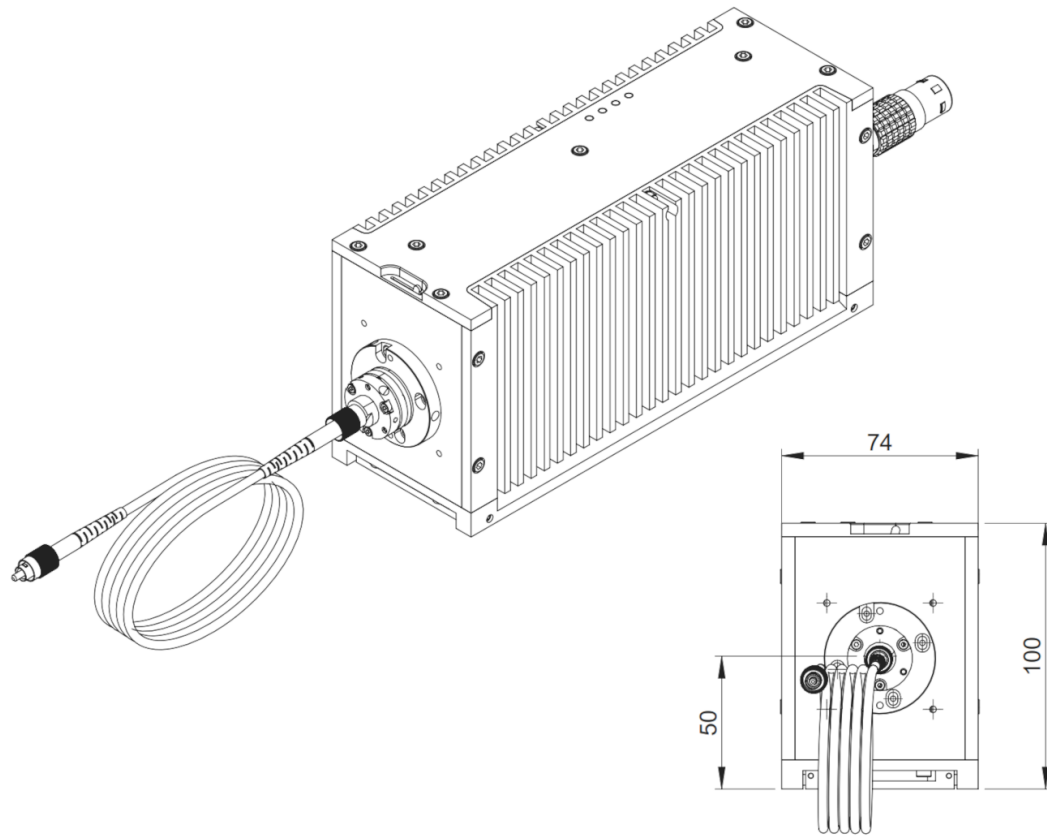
Front view of an LDH-FA laser head with bulk housing and fiber
